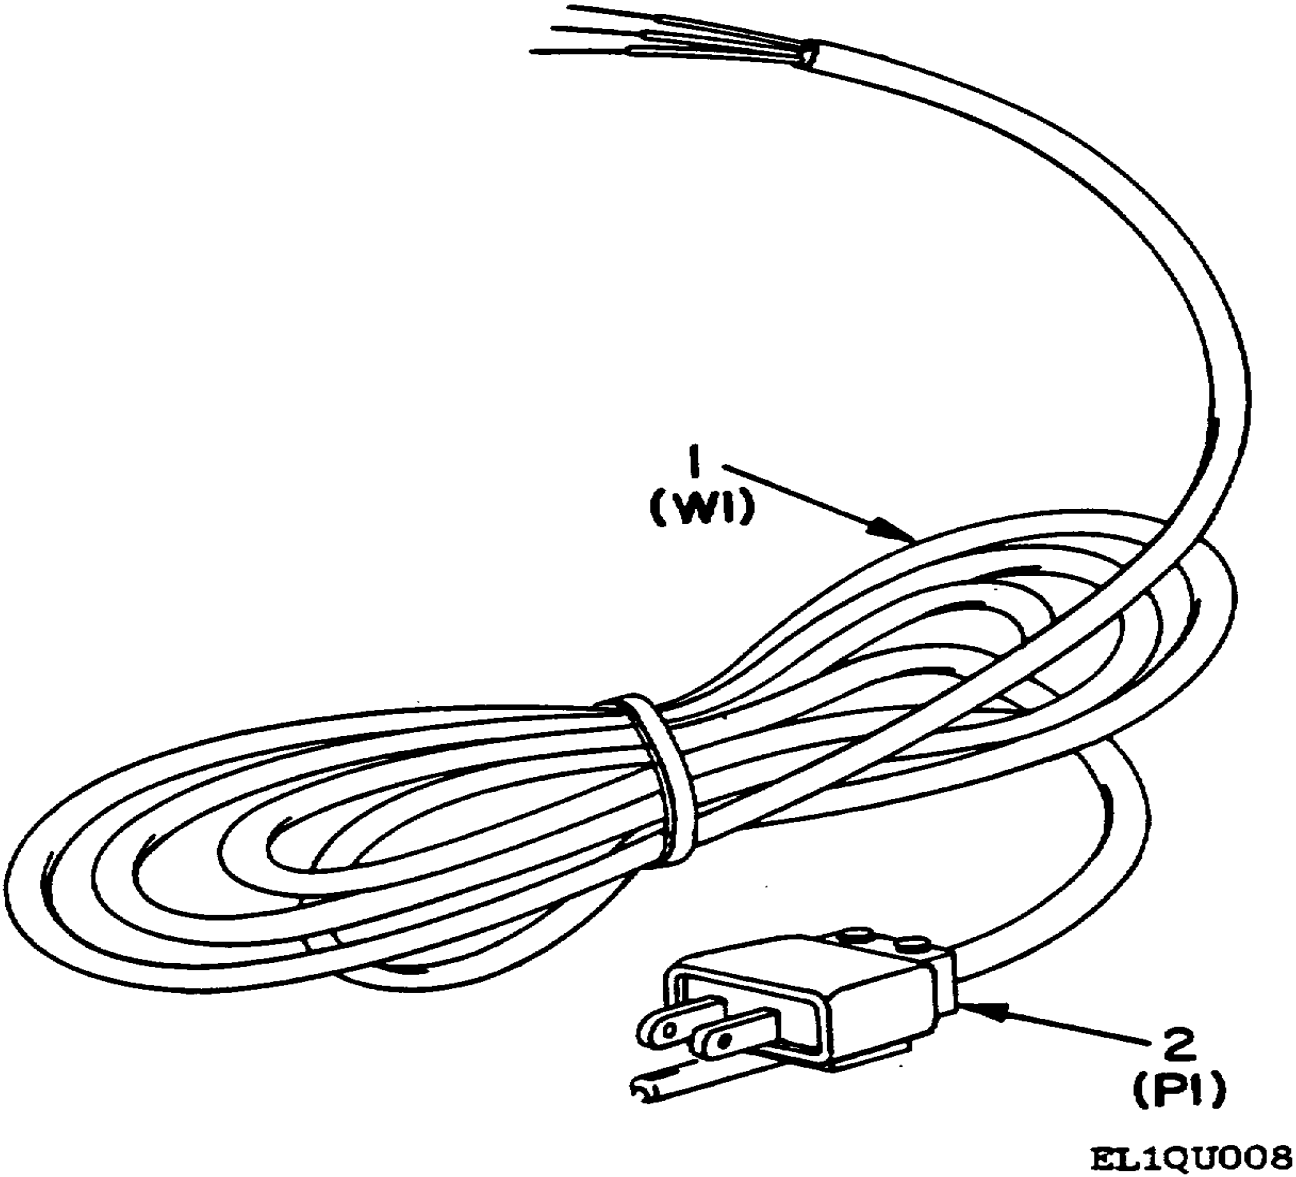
Projector, Still Picture PH-637E/PFP, Cable Assembly
